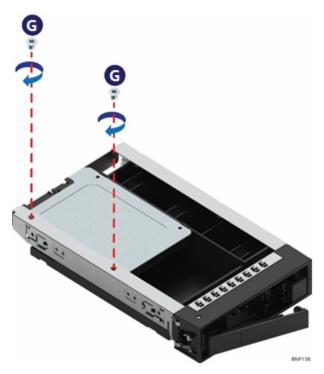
3.5" Drive Carrier to 2.5" SSD Bracket – Secure SSD to Carrier
